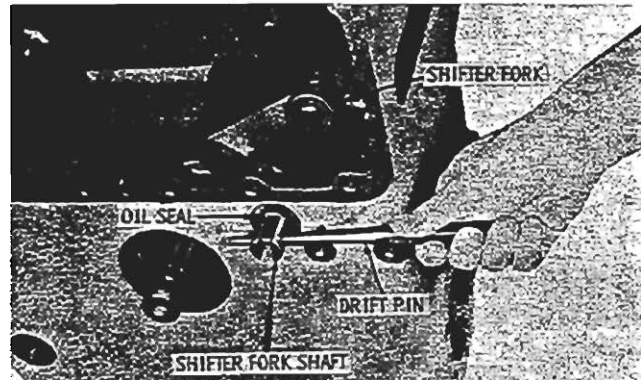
REMOVING DISCONNECT SHIFTER SHAFT
